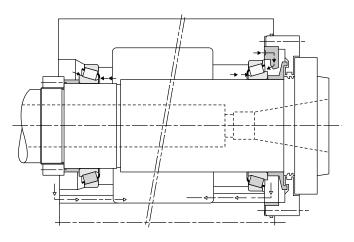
Simple paired TS mounting with oil jets at both ends of the rollers for inlet and cooling.
